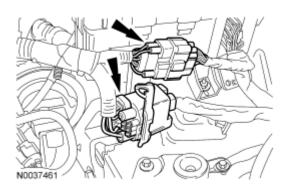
Locating Engine Wiring Harness Electrical Connectors Courtesy of FORD MOTOR CO.
